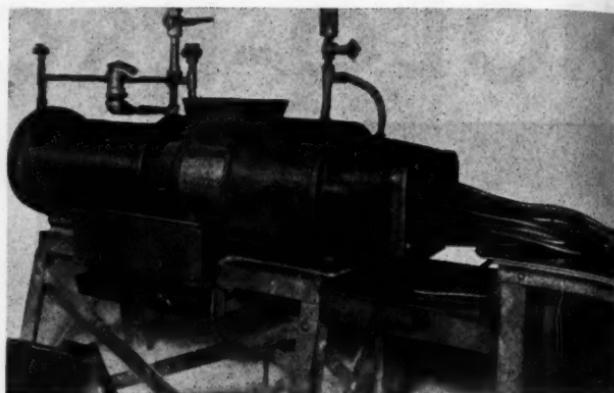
Using an air-operated machine to form the grease into plugs for use in grease cups on side and main rods.
